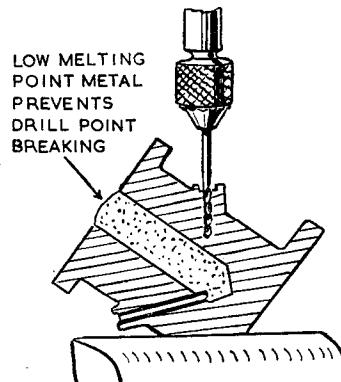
When drilling at an angle into a large hole, less breakages will occur if large hole is filled with "Cerrobend"
